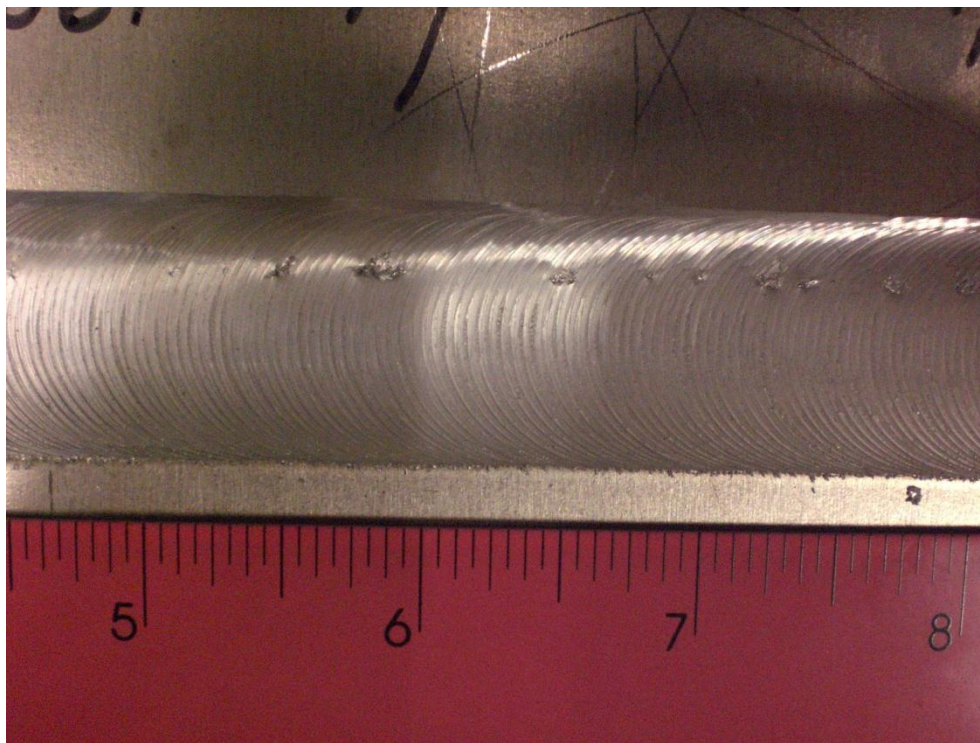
Visible wormholes, Sample 17. Wormholes are internal voids that extend to the surface of the weld. This defect is highly detrimental to visual appearance of the weld.
